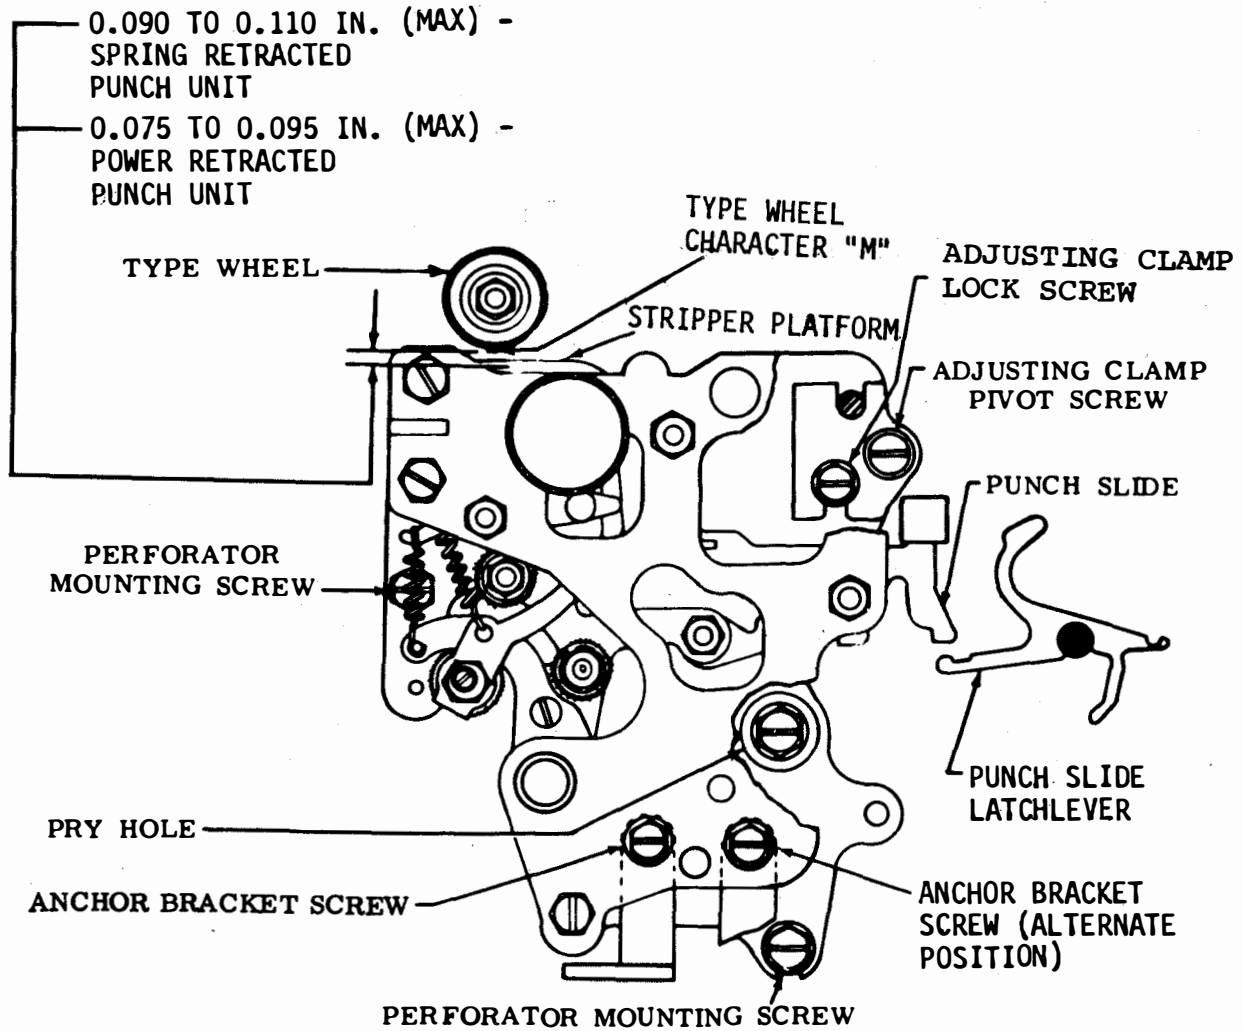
Perforator Position (Spring Retracted and Power Retracted Punch Unit) (Typing Perforator Only)
